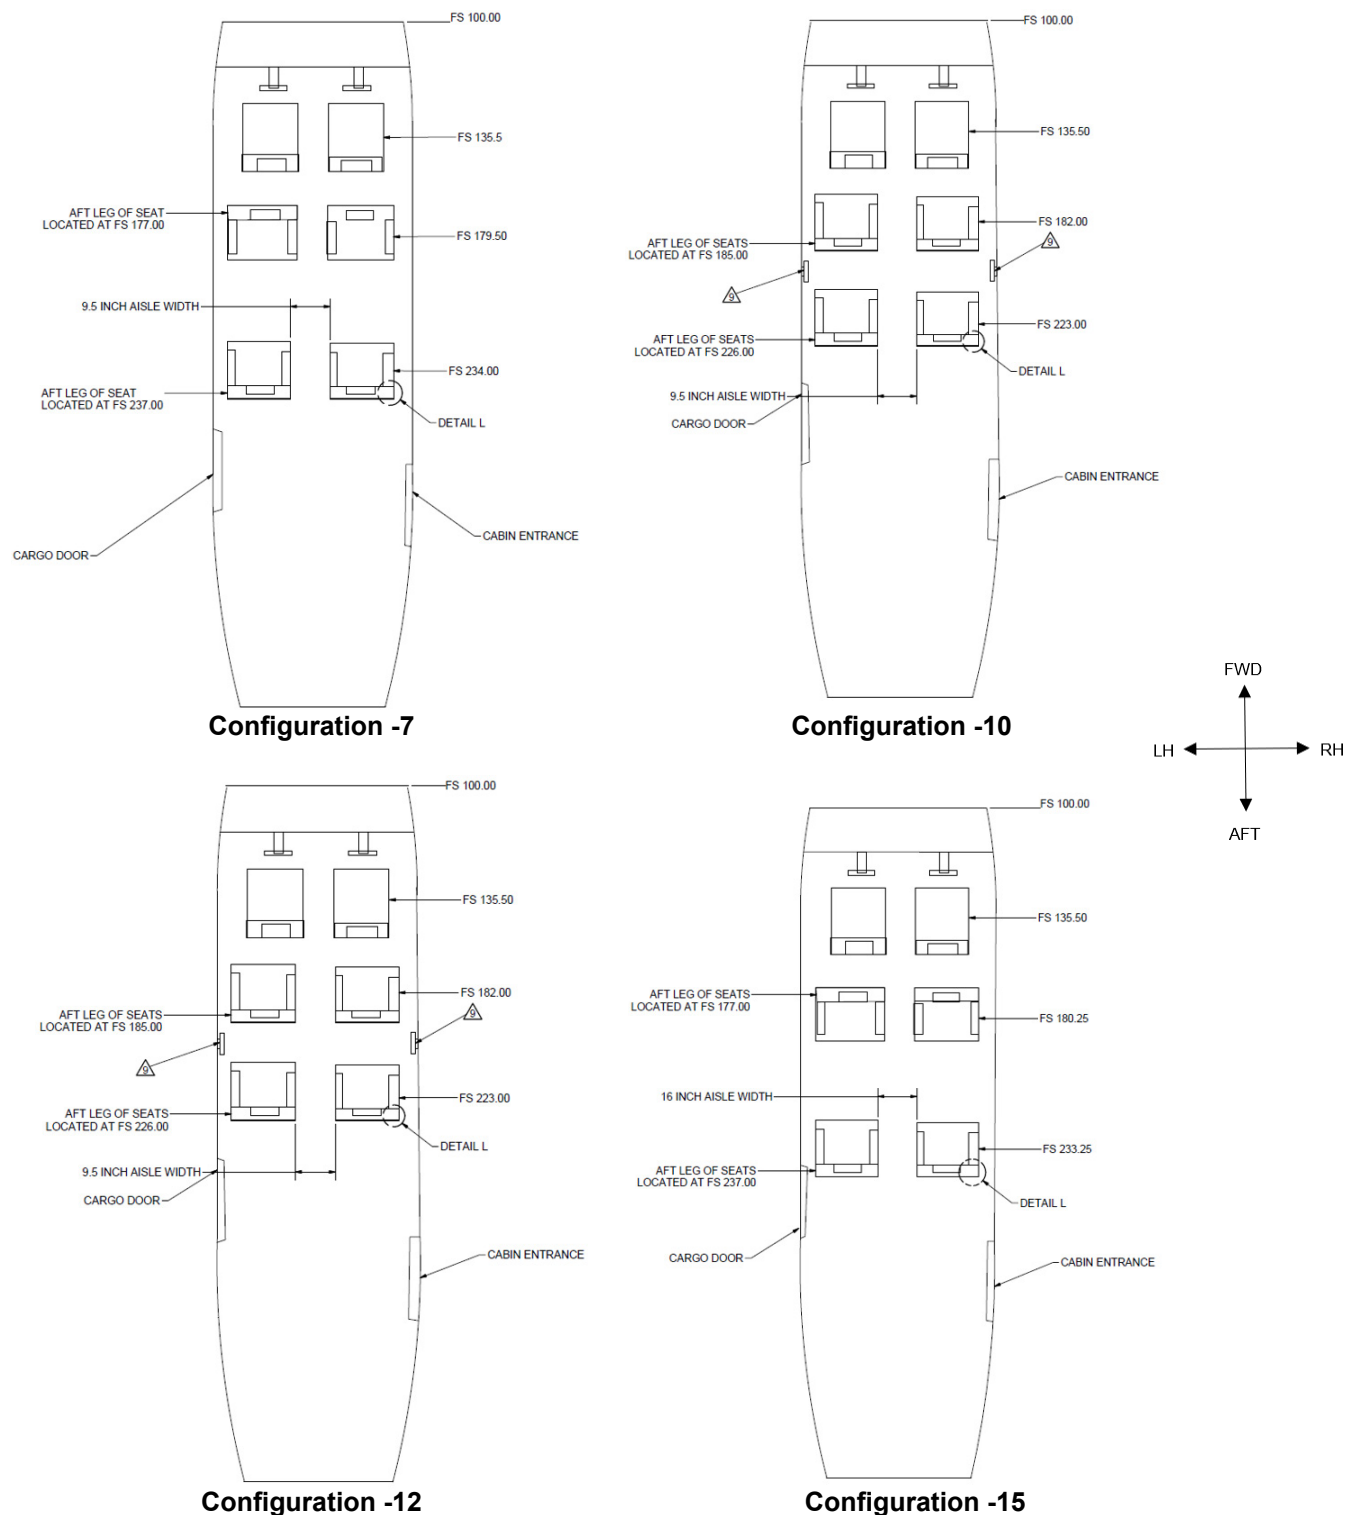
Seating Configuration -7, -10, -12, and -15 (see drawing 1004845)
